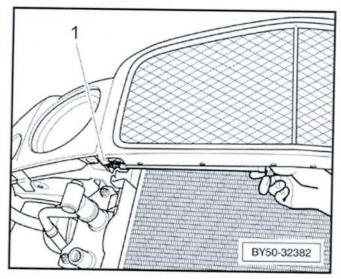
Note: Image shows bumper removed, this is only for illustration purposes
